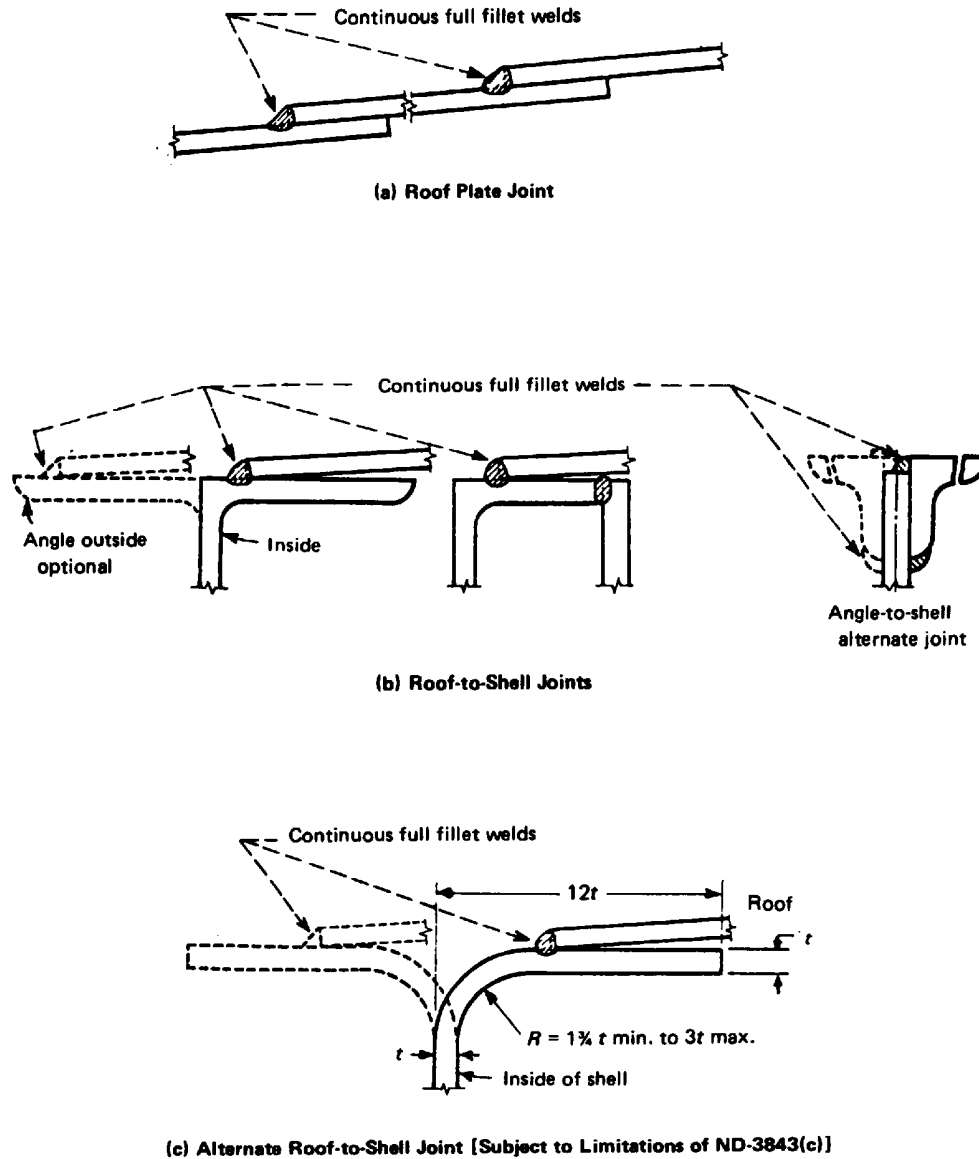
TYPICAL ROOF AND ROOF-TO-SHELL JOINTS
